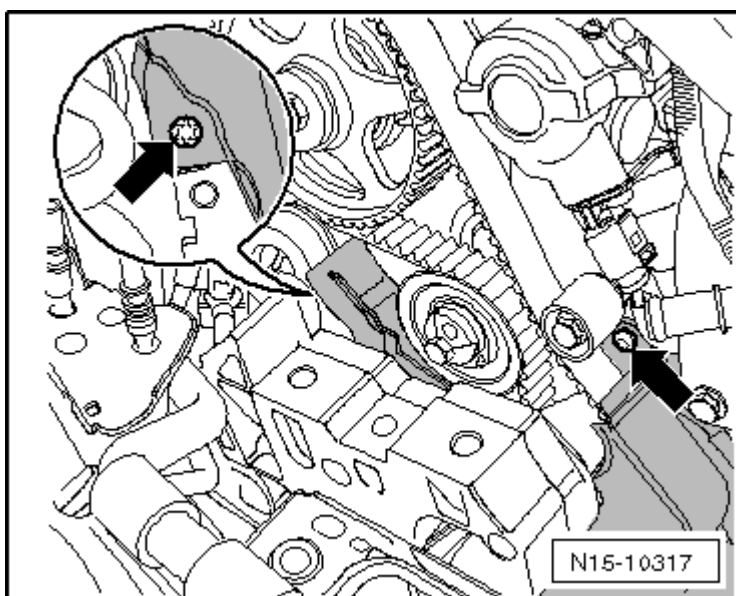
Identifying Toothed Belt Guard Upper Bolts
